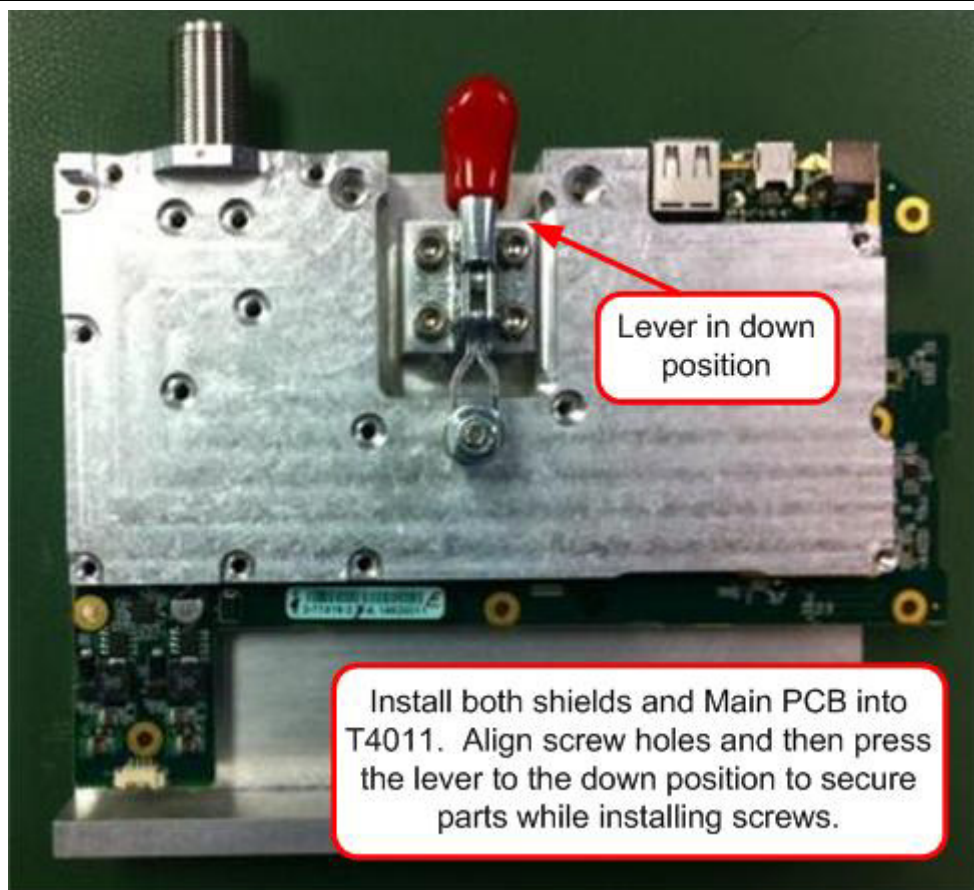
Shields, Main PCB and T4011 Test Fixture
